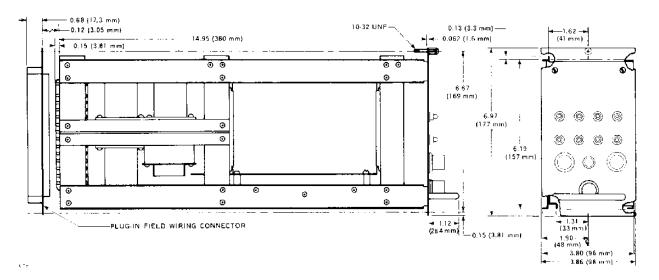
Mounting Dimensions of the R6001 Auxiliary Zone Unit in Inches (mm).
